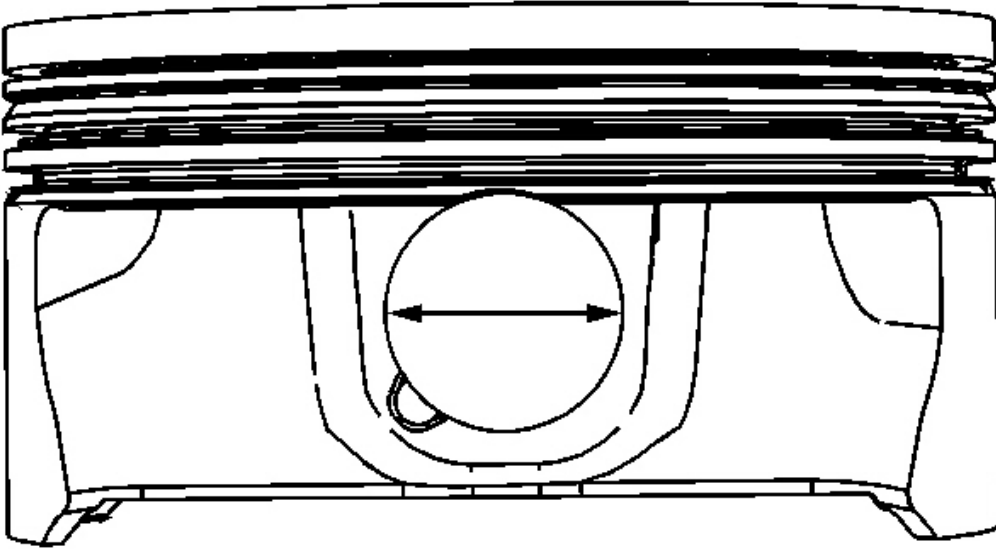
Measuring Piston Pin-To-Bore Clearance
